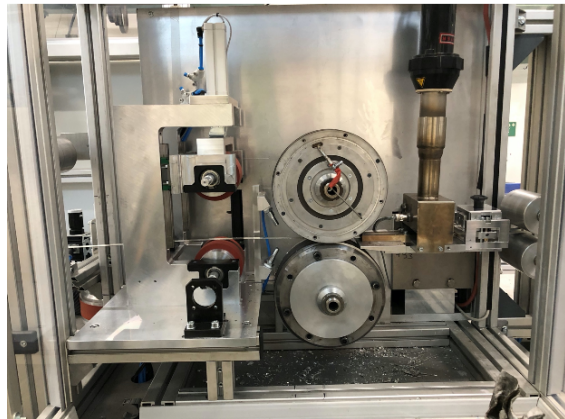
Machine used to solder bare tape and shunt together on long lengths. Courtesy of THEVA.
